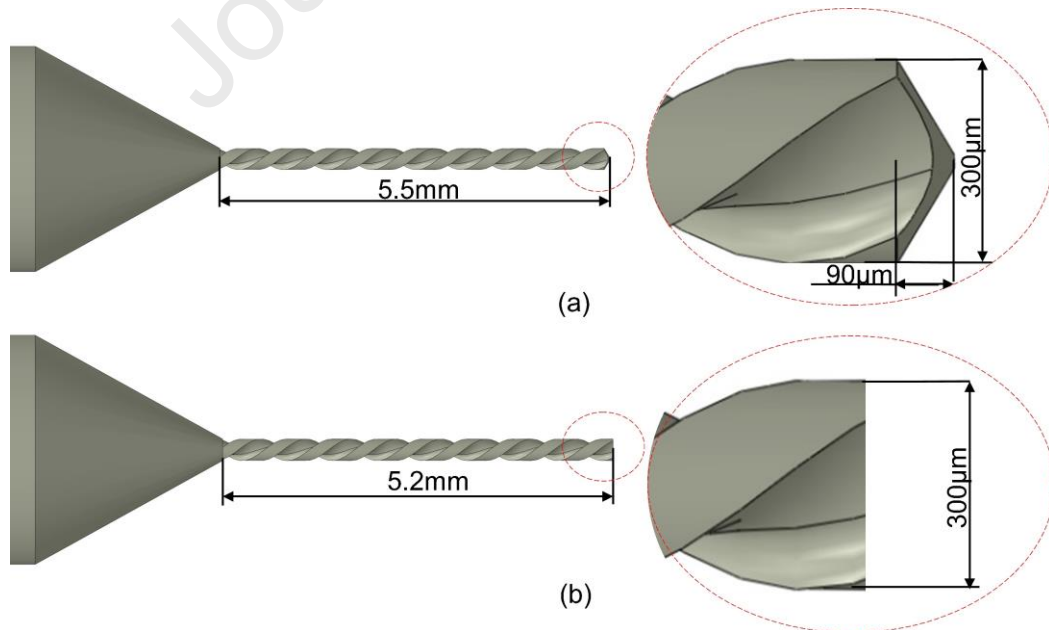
Tool electrodes. (a) Tungsten steel drill. (b) Tungsten steel drill without tool tip.
